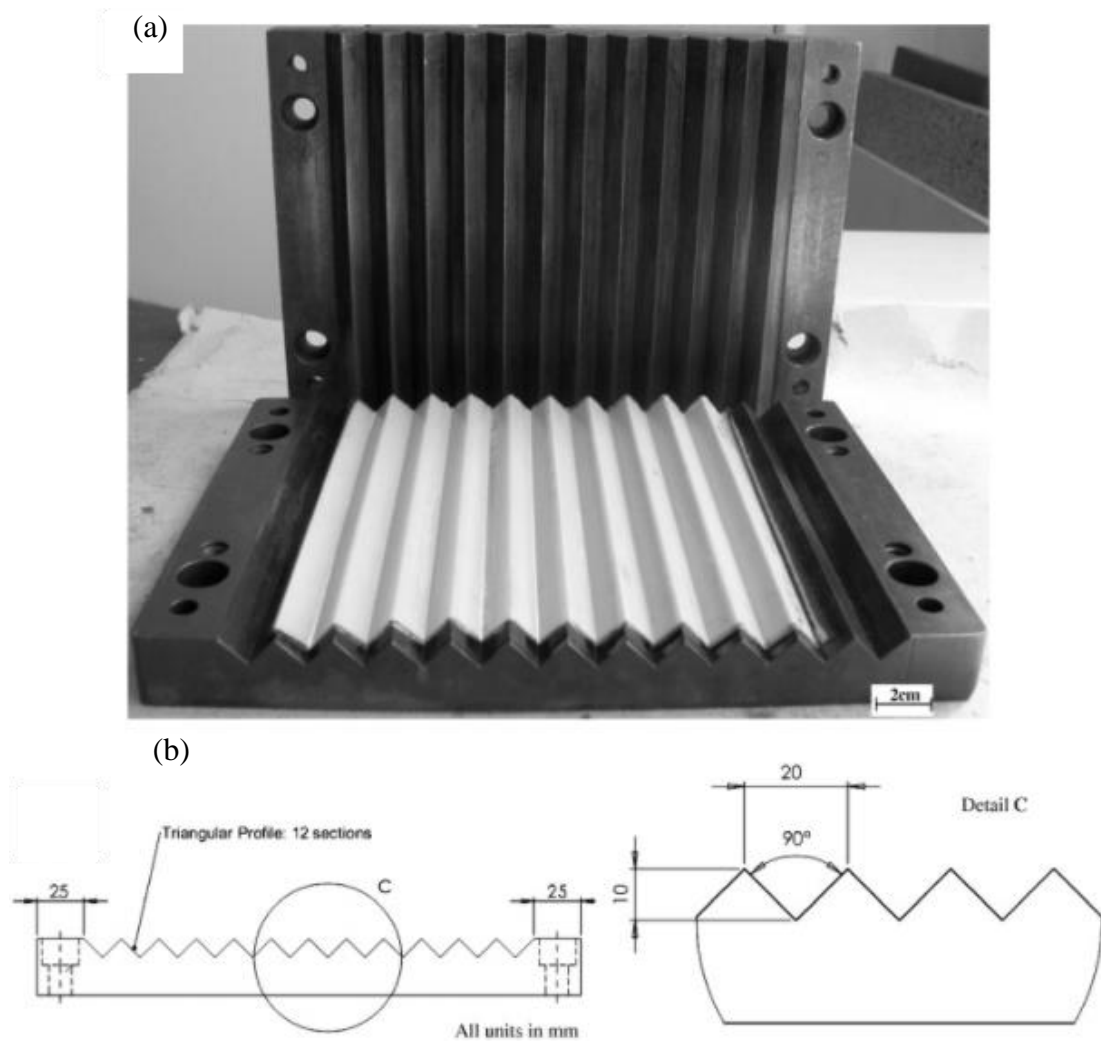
The manufacturing of triangular corrugated-core using hot press technique (a) Corrugated mould is made from steel and, (b) the profile angle of the mould [29].
